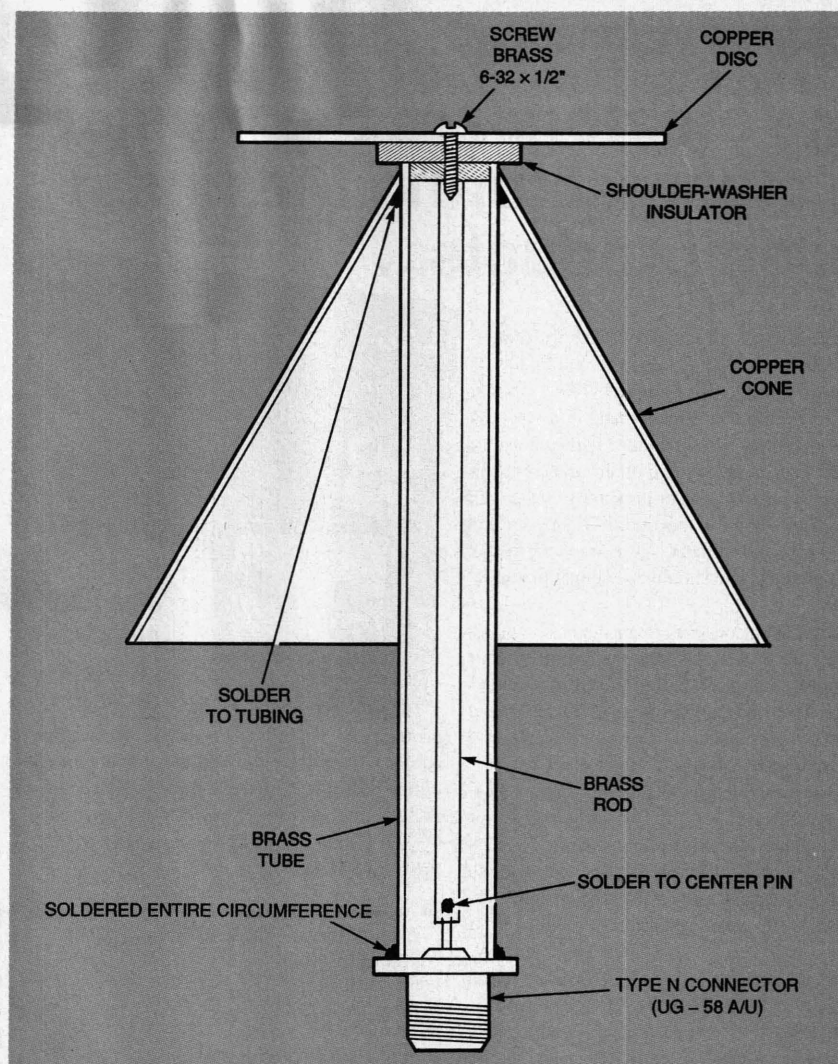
ASSEMBLY VIEW of the discone antenna. Parts should fit firmly together before soldering is attempted. Clean surfaces to be soldered to a bright shine with #0 steel wool.
